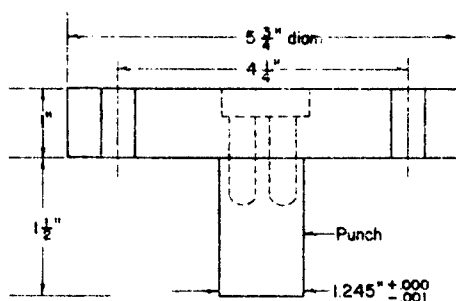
DRAWING OF FORGING DIE ASSEMBLY
